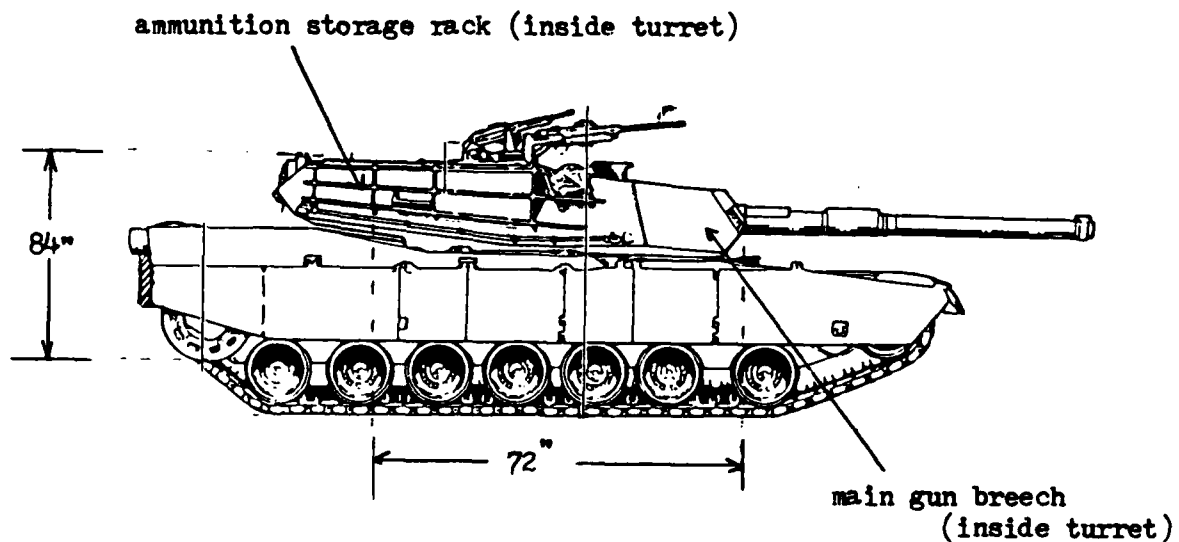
MANIPULATOR WORKSPACE DIMENSIONS
